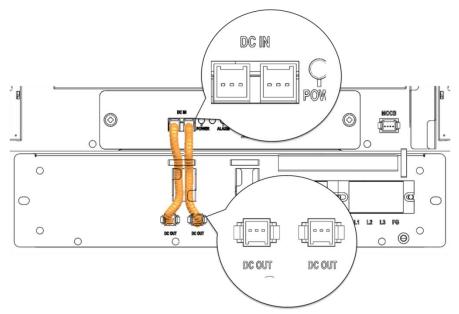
DC Power Cables from SMPS Assembly Type B to Switchgear
